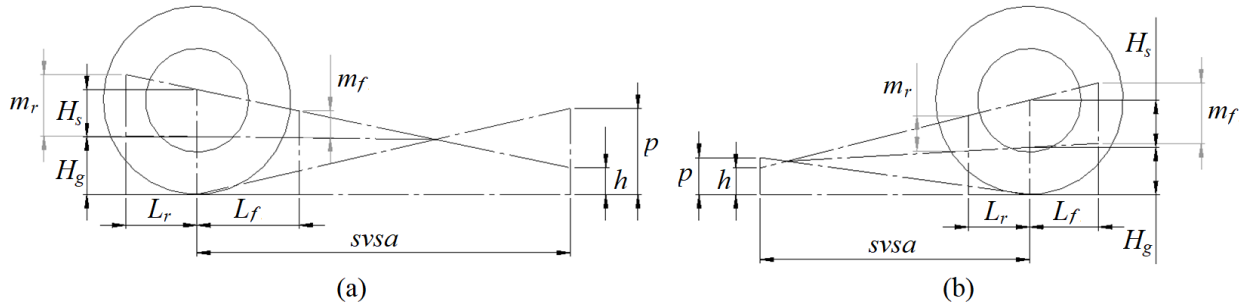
Side view of the suspension mounting points for the (a) rear axle and the (b) front axle.
